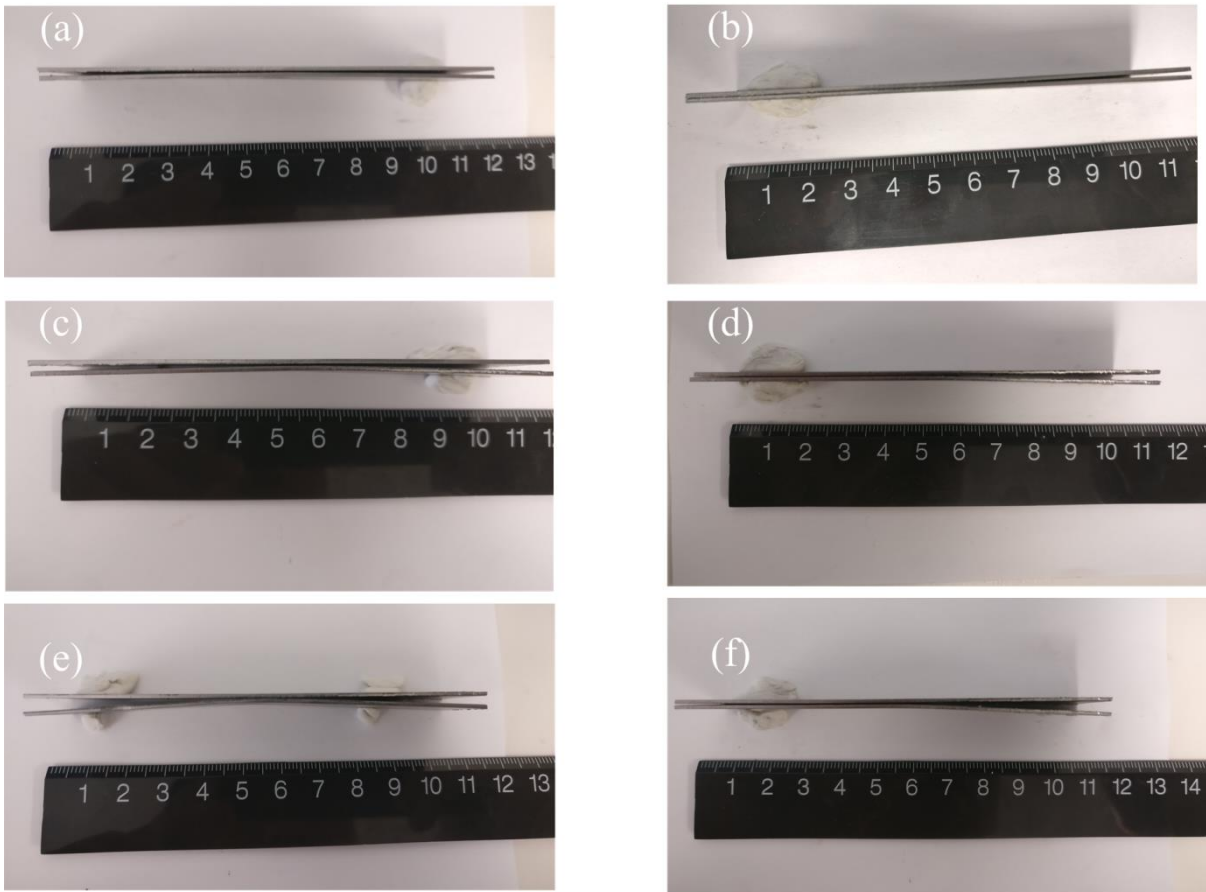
Welds with poor fit-up problems. (a) 0.5 mm double gap. (b) 0.5 mm single gap. (c) 1 mm double gap. (d) 1 mm single gap. (e) 2 mm double gap and (f) 2 mm single gap
